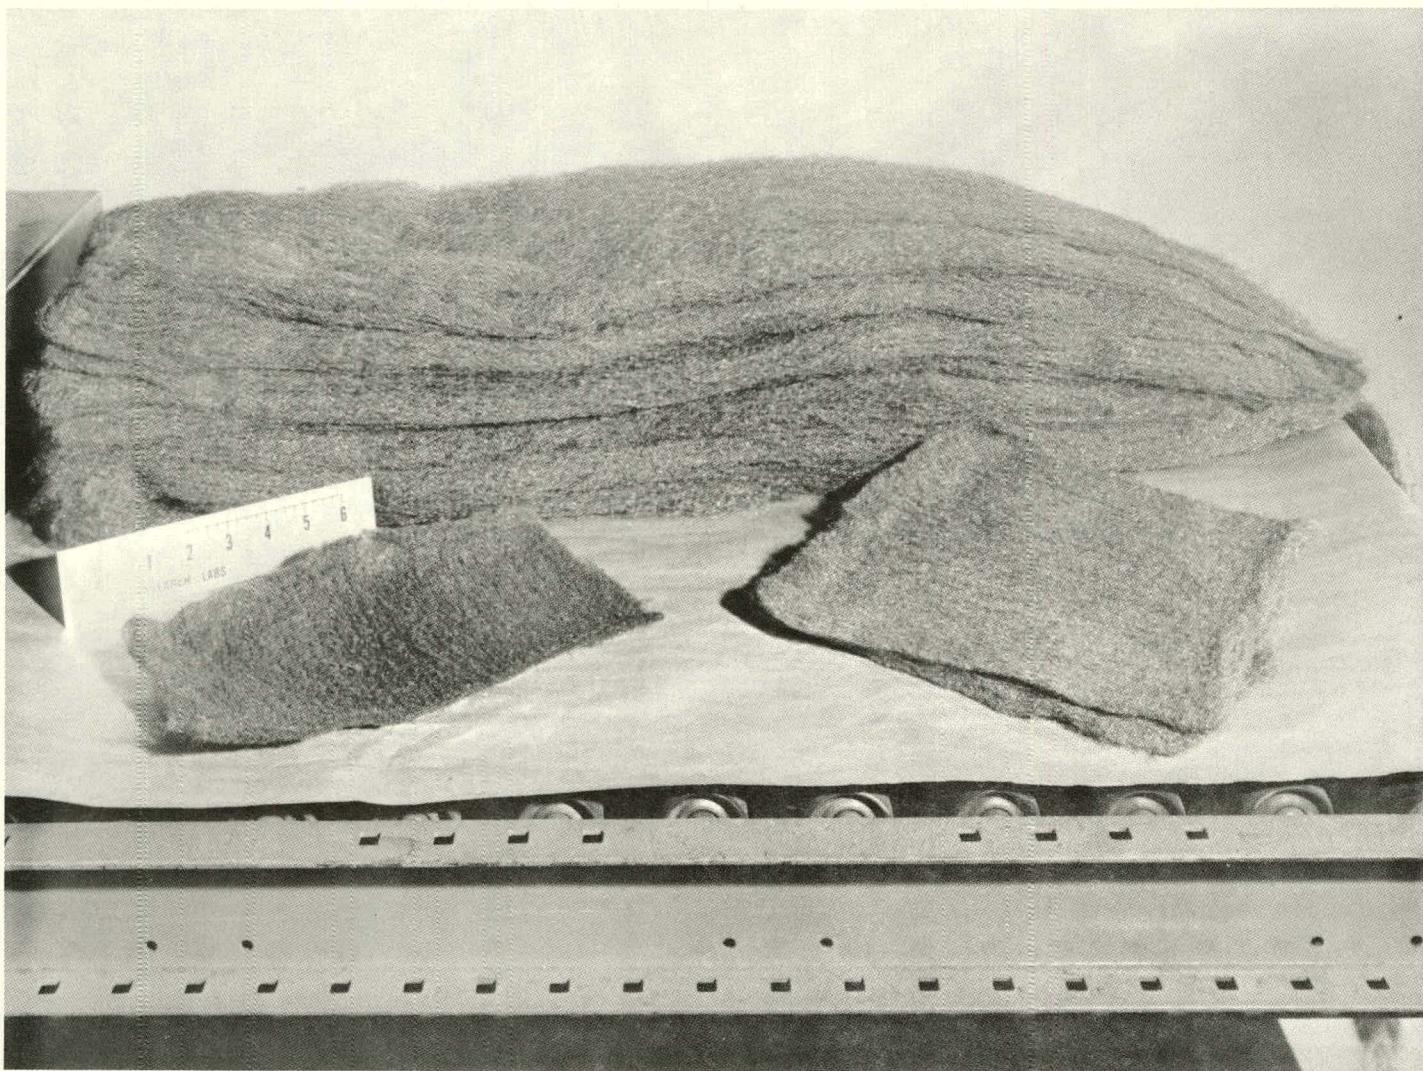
Fiber lay-ups and section of fiber plaque after processing through a needle-punching machine
